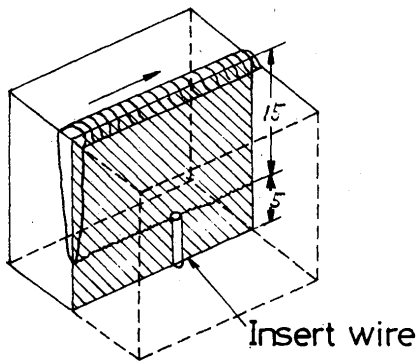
Appearance of experimental setting for insert dissimilar metal.
